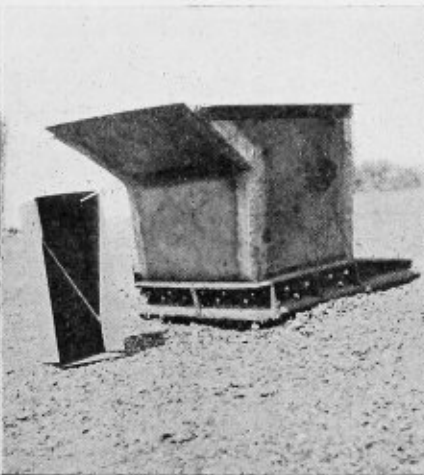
Locomotive Ash Pan and Tool Box Welded and Ready for Installation
